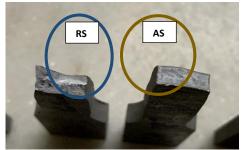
Fracture of three flat threaded tensile specimen at 1200 rpm
